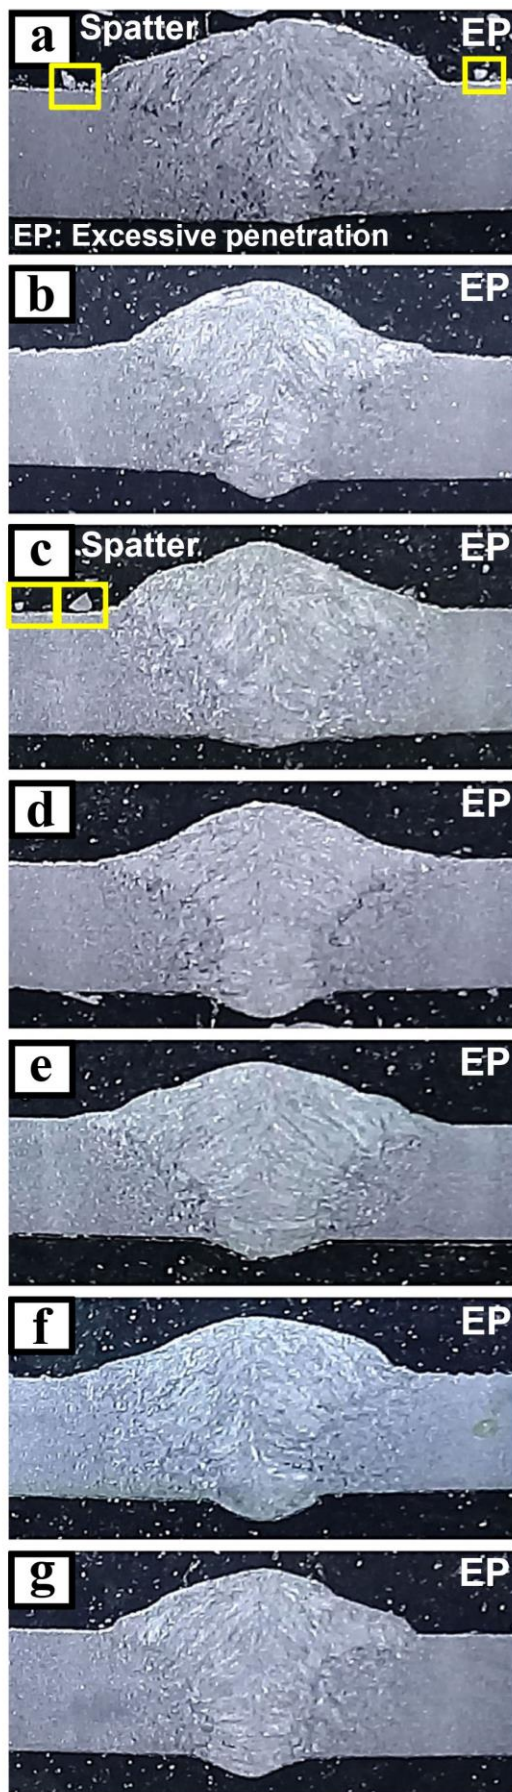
Cross-section of welded joints in C-80 steel.
